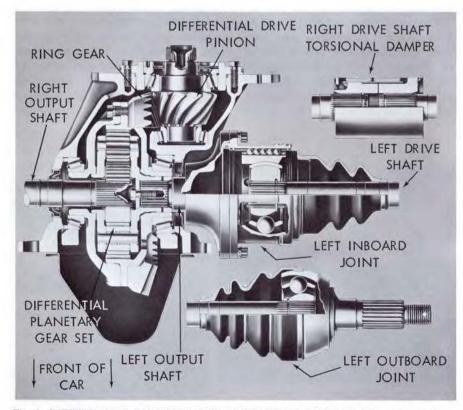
DIFFERENTIAL ASSEMBLY AND DRIVE SHAFT COMPONENTS (PLAN VIEW). The Toronado differential is located on the left (driver's) side of the car and feeds torque directly to the left drive shaft. A cross shaft provides torque to the right drive shaft. The right drive shaft contains a rubber damper which cushions peak forces for maximum drive smoothness.
